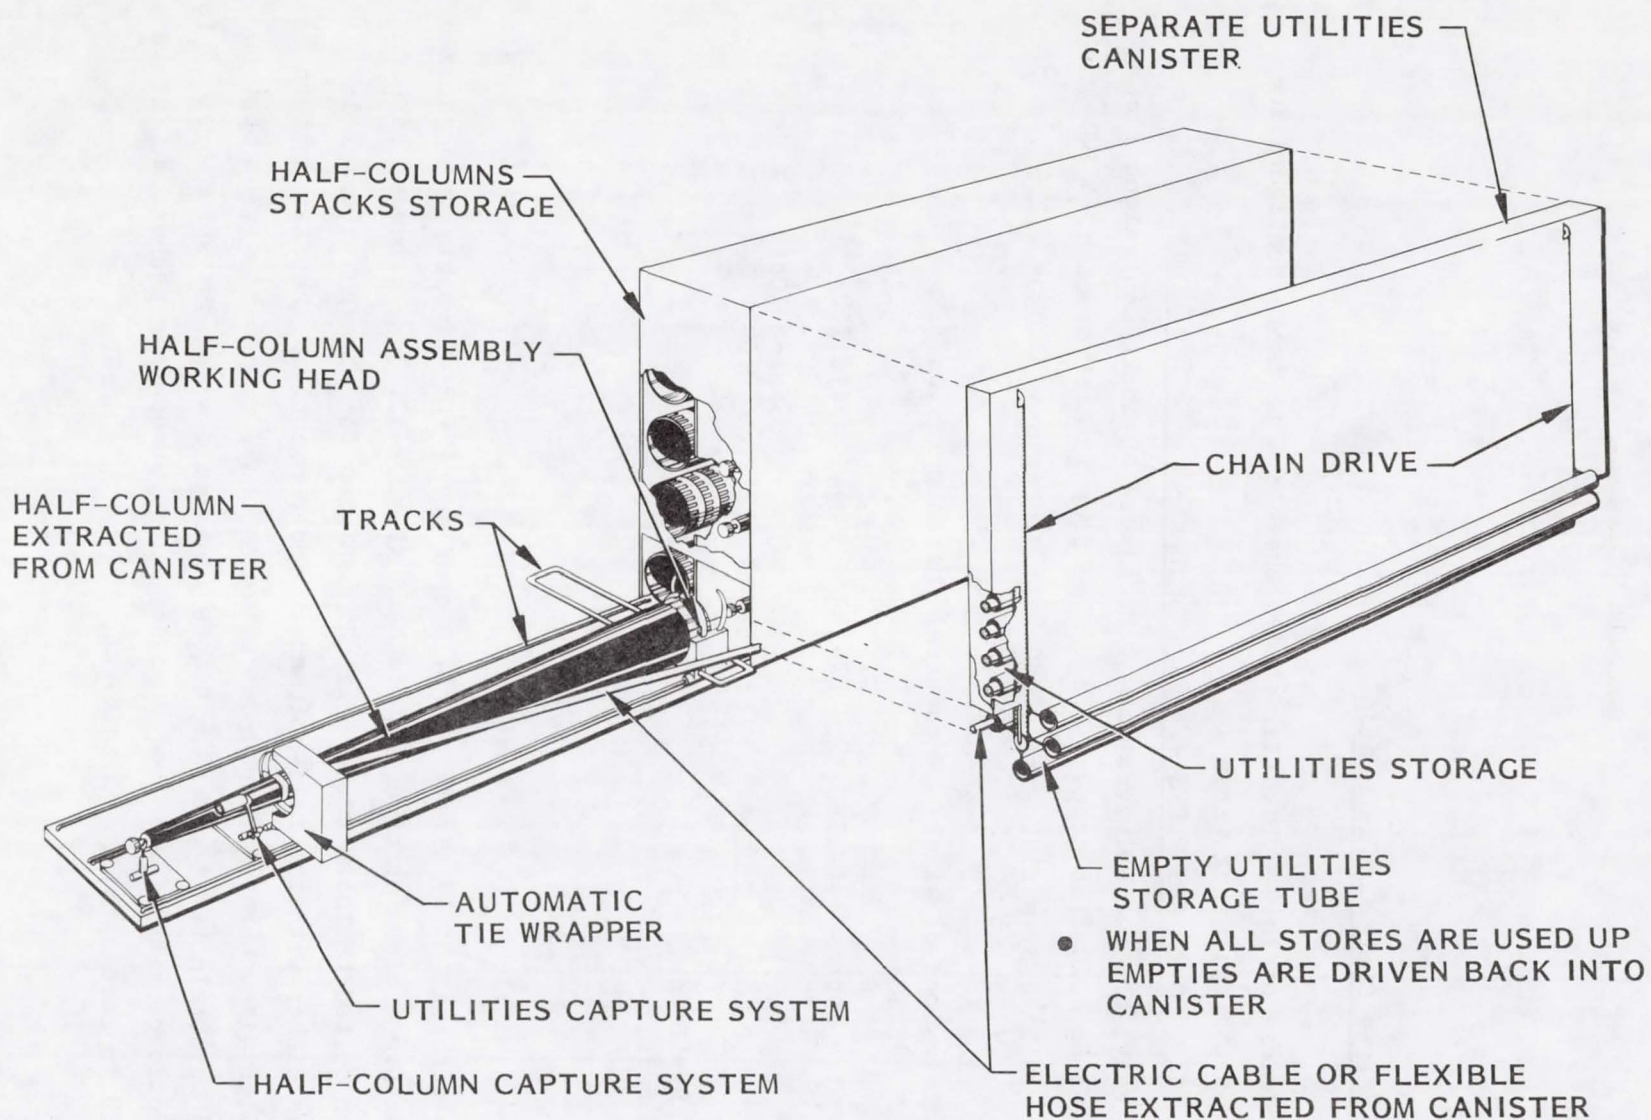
Segmented Cable Installation System with Separate Cable Canister
